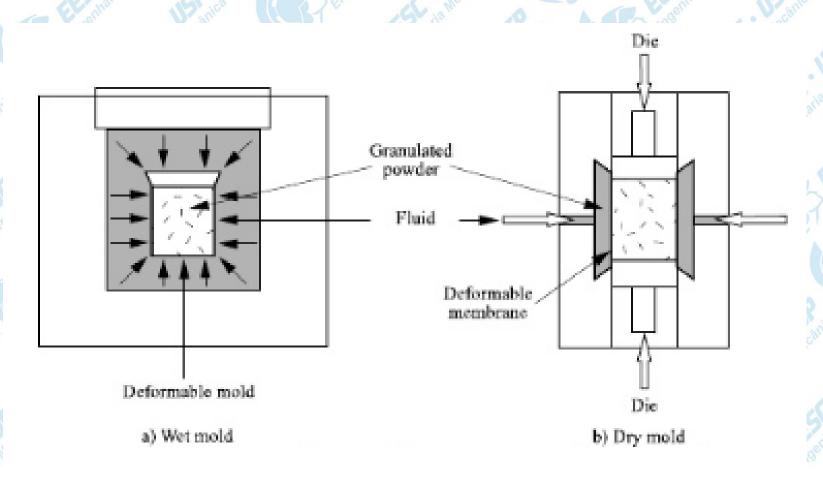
Principles of isostatic pressing: a) wet mold, b) dry mold
